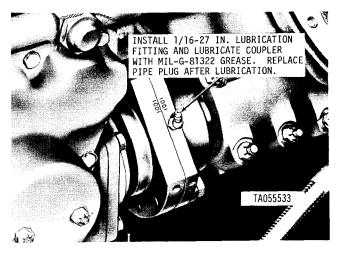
Removing fuel injection pump drive coupling with lubrication fitting installed.
